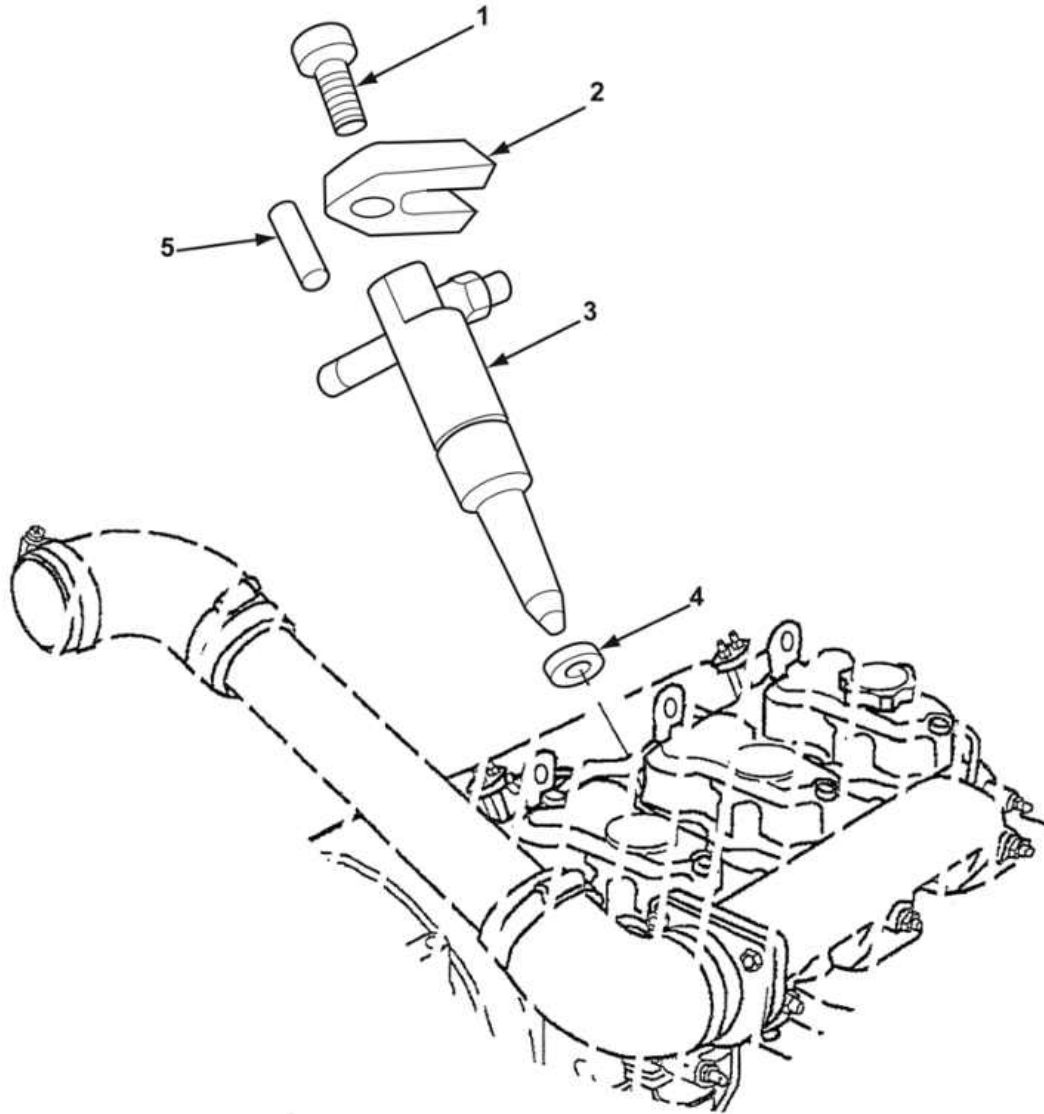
NOZZLE AND HOLDER ASSEMBLY
